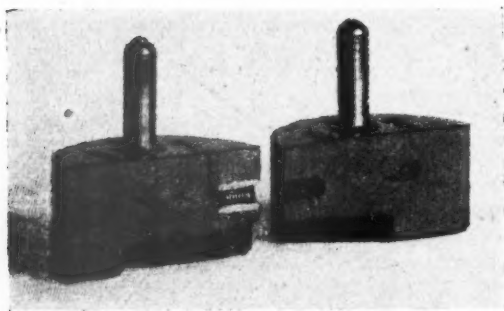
SECTION OF MOULDING SHOWN IN FIG. 12.
